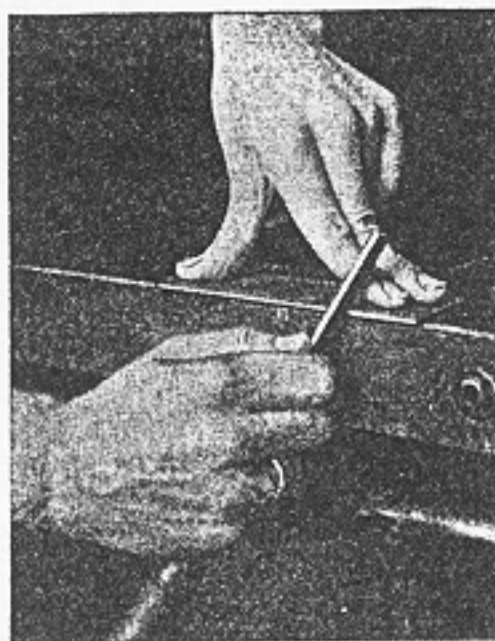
Turning edge of hand scraper, holding it flat over the edge of the bench.
